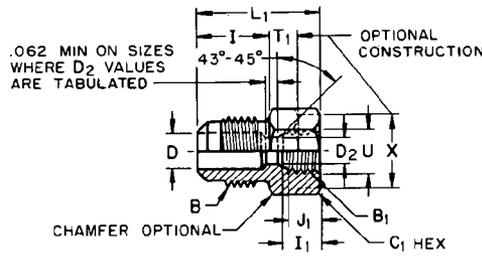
INTERNAL FLARE TO EXTERNAL FLARE REDUCING ADAPTER
